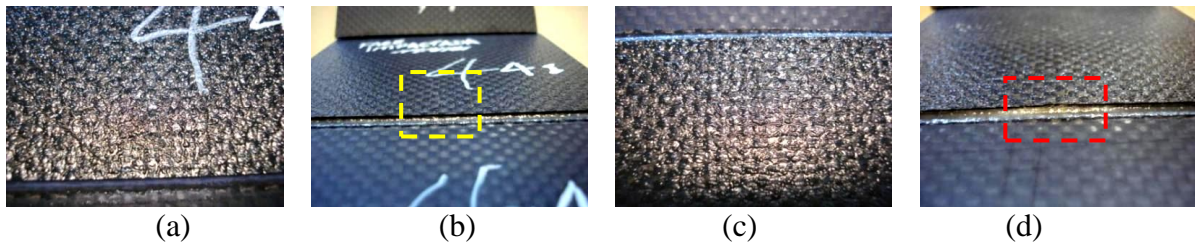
EPX-C test coupon impacted at 10 J: (a) Impacted side; (b) Corresponding weldline; (c) Rear side; (d) Respective weldline.
